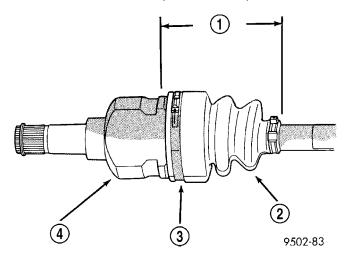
Sealing Boot End to End Length with Silicone Boot
